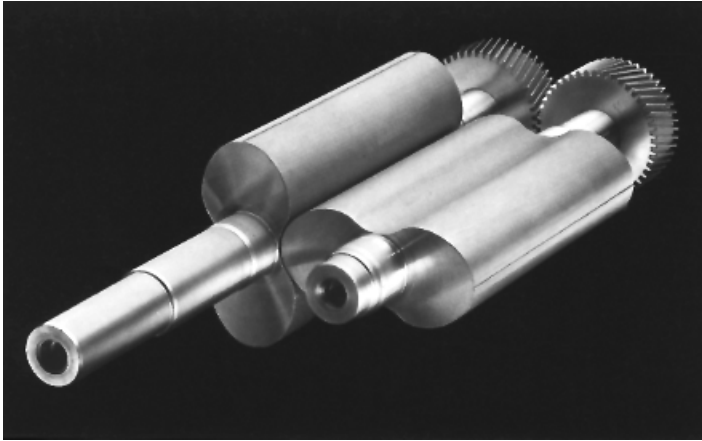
Integral shaft ductile iron rotors and impellers for lobe blowers. (*Aerzen USA Company, Coatesville, Pa.*)
